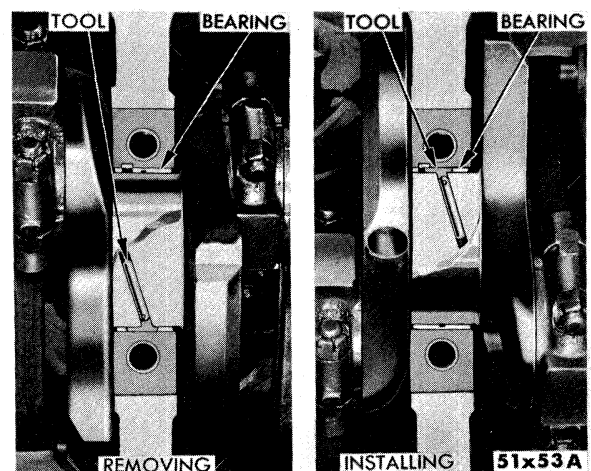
Removing and Installing Main Bearing Upper Shell
